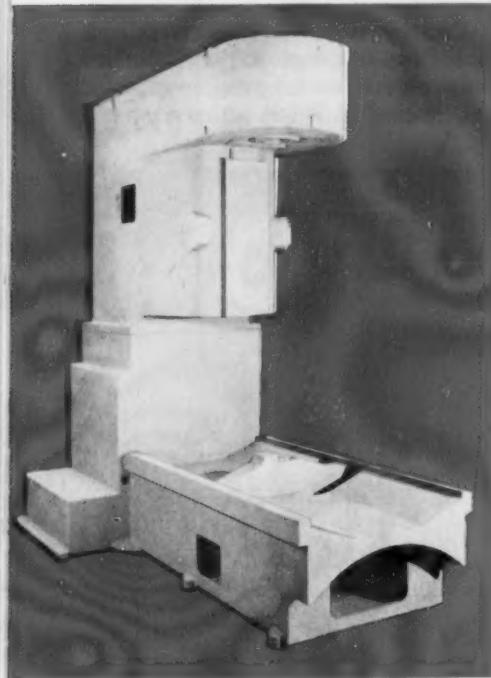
This base and column for a precision boring, milling and drilling machine are of welded steel plate, combining good appearance with unusual rigidity. Note the locating bosses welded to side of column for positioning weldment during machining.
